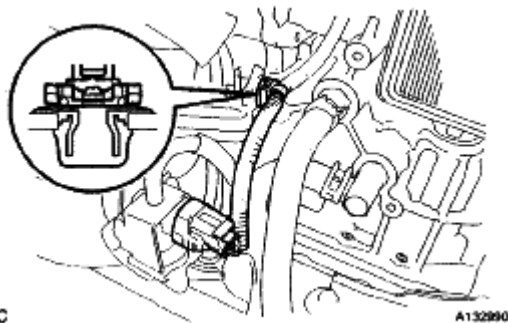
Identifying Front Frame Assembly Connector & Clamp
